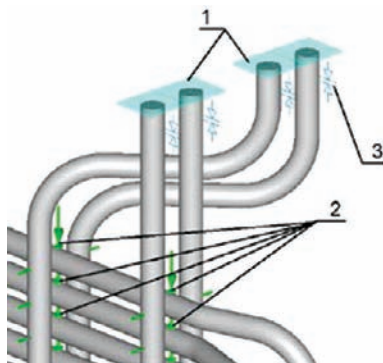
Support method of the superheater SH3: 1 – Anchor, 2 – Guide, 3 – Cut Short
